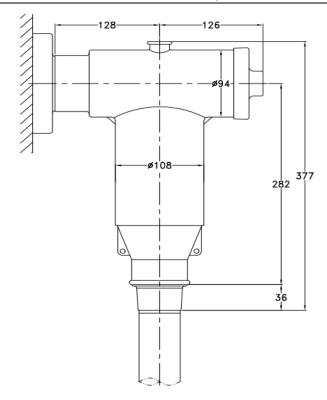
Pad-mounted version MV bushing front connector(Dead Break Connect)
